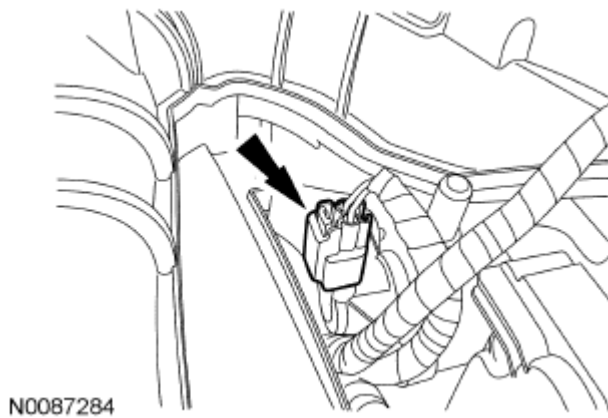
Locating Evaporative Emission Canister Purge Valve Electrical Connector
